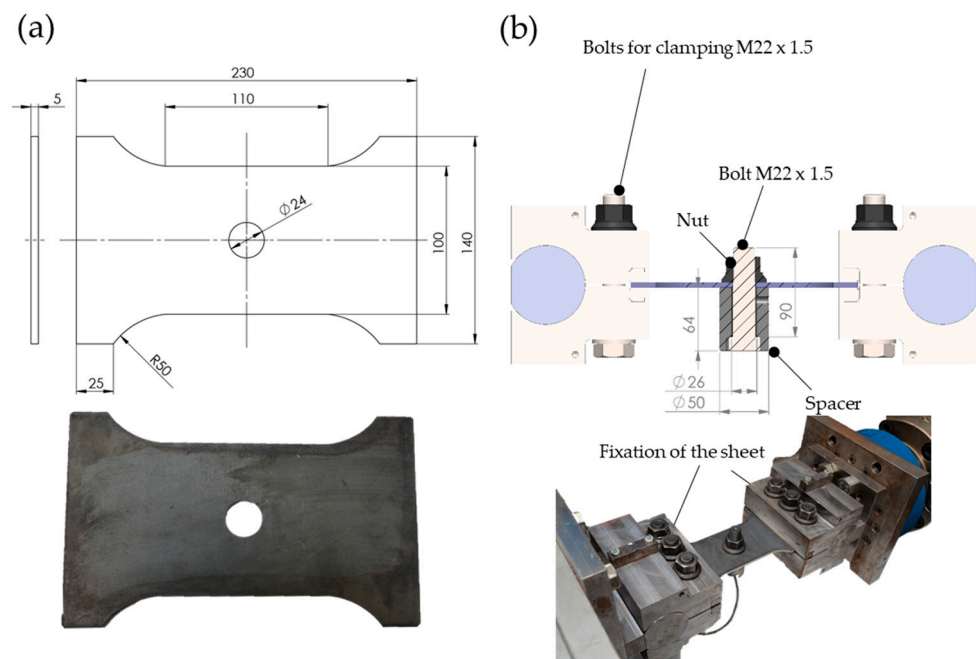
Used specimen and test setup: (a) Drawing and photograph of the test specimen with dimensions in mm; (b) Used test setup for cyclic loading.
